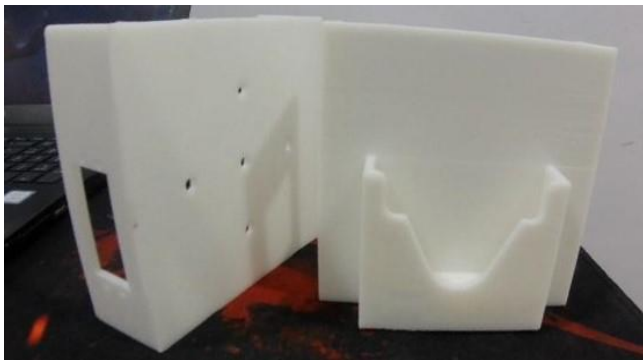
Printed Rx Holder and Antenna Plate
